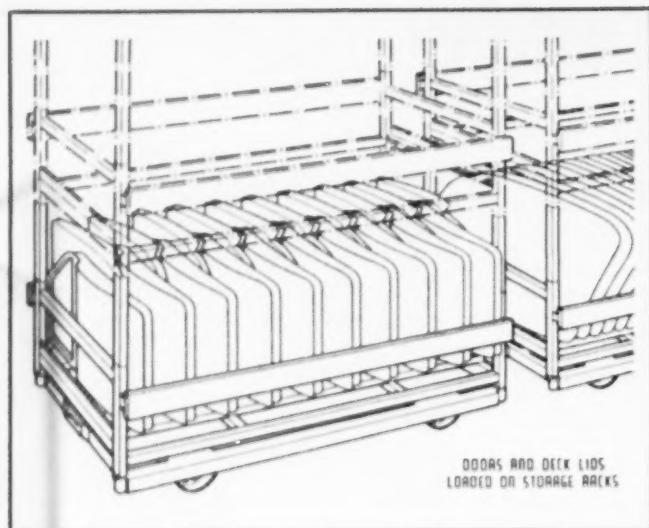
Standard tubular racks loaded with panels or assemblies.
